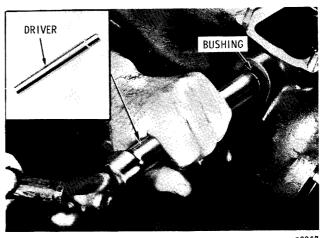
Removing (or installing) shifter fork shaft bushings
